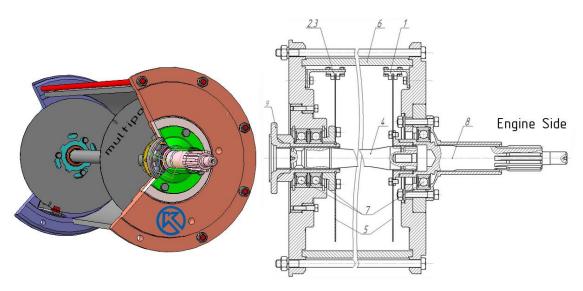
Device for changing the torque of the ICE at the unsteady mode: (with 1,2,3 - optical sensors; 4 - torsion shaft; 5 - measuring discs; 6 - housing, 7 - bearings, 8 - drive shaft, 9 - cardan shaft flange).
